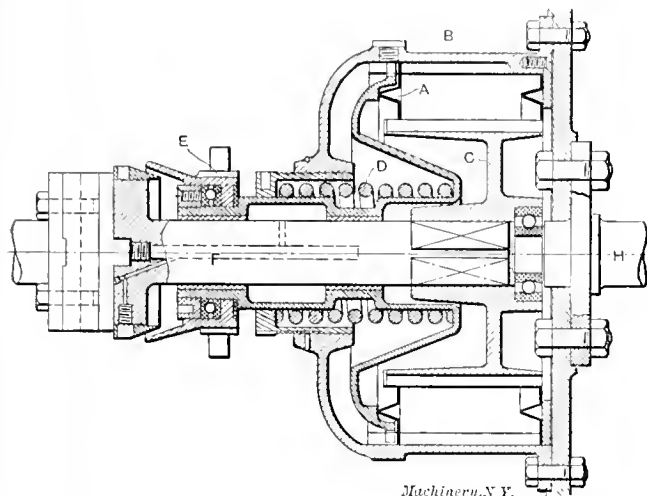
Section of the Hele-Shaw Clutch, showing Design of Details.
